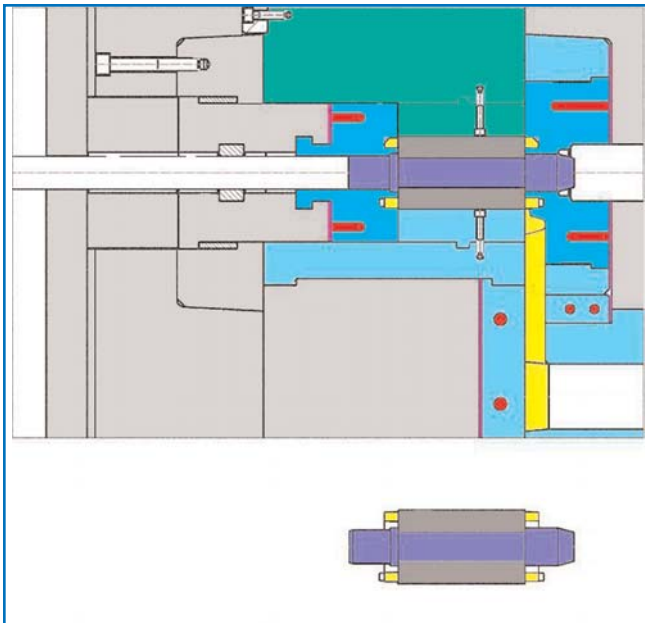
Horizontal pressure die caster with tooling for rotor casting in closed position. The arbor (dark blue) and the steel rotor laminations (dark gray) are shown in the detail beneath and in position in the machine. Copper from the shot sleeve biscuit, runner, and end rings are shown in yellow. The nickel alloy end ring inserts are shown in medium blue with electrical resistance heater elements in red. These are backed with insulation (pink), as are the runner inserts that would be nickel alloy or tungsten. Red circles here indicate heater positions. The movable slide to allow insertion and removal of the rotor is shown in green. Ordinary steel backing plates of the master mold set are shown in light gray. (Courtesy of DieTec, GmbH)
